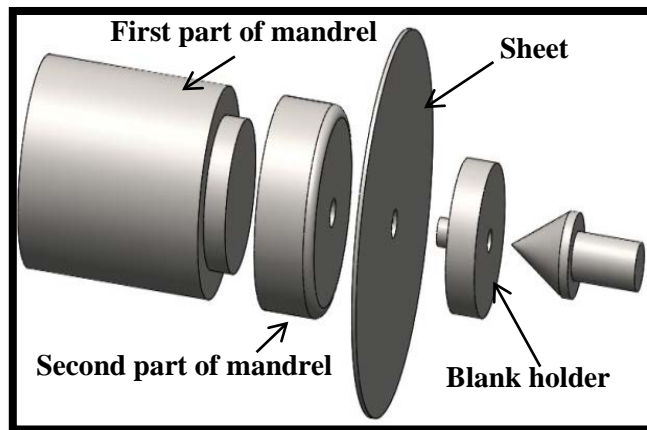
Shown the Mandrel with Two Parts, Sheet and Blank Holder
